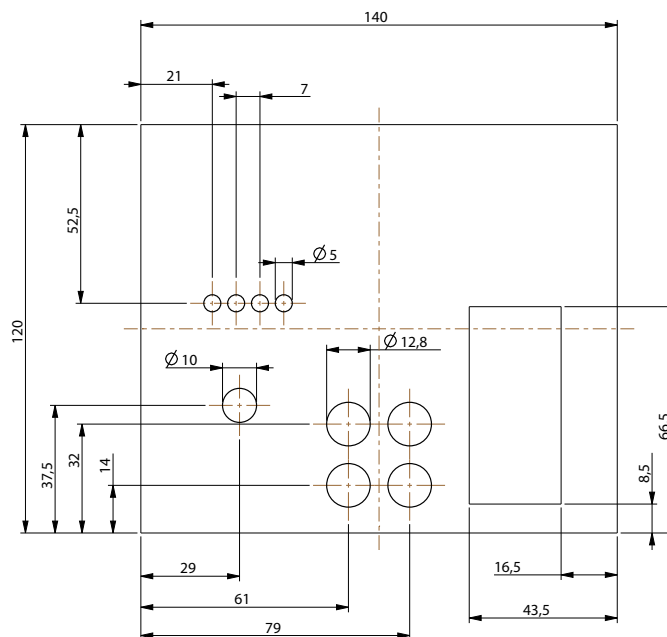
Design drawing of the baseplate. It is a 8 mm aluminium plate.
